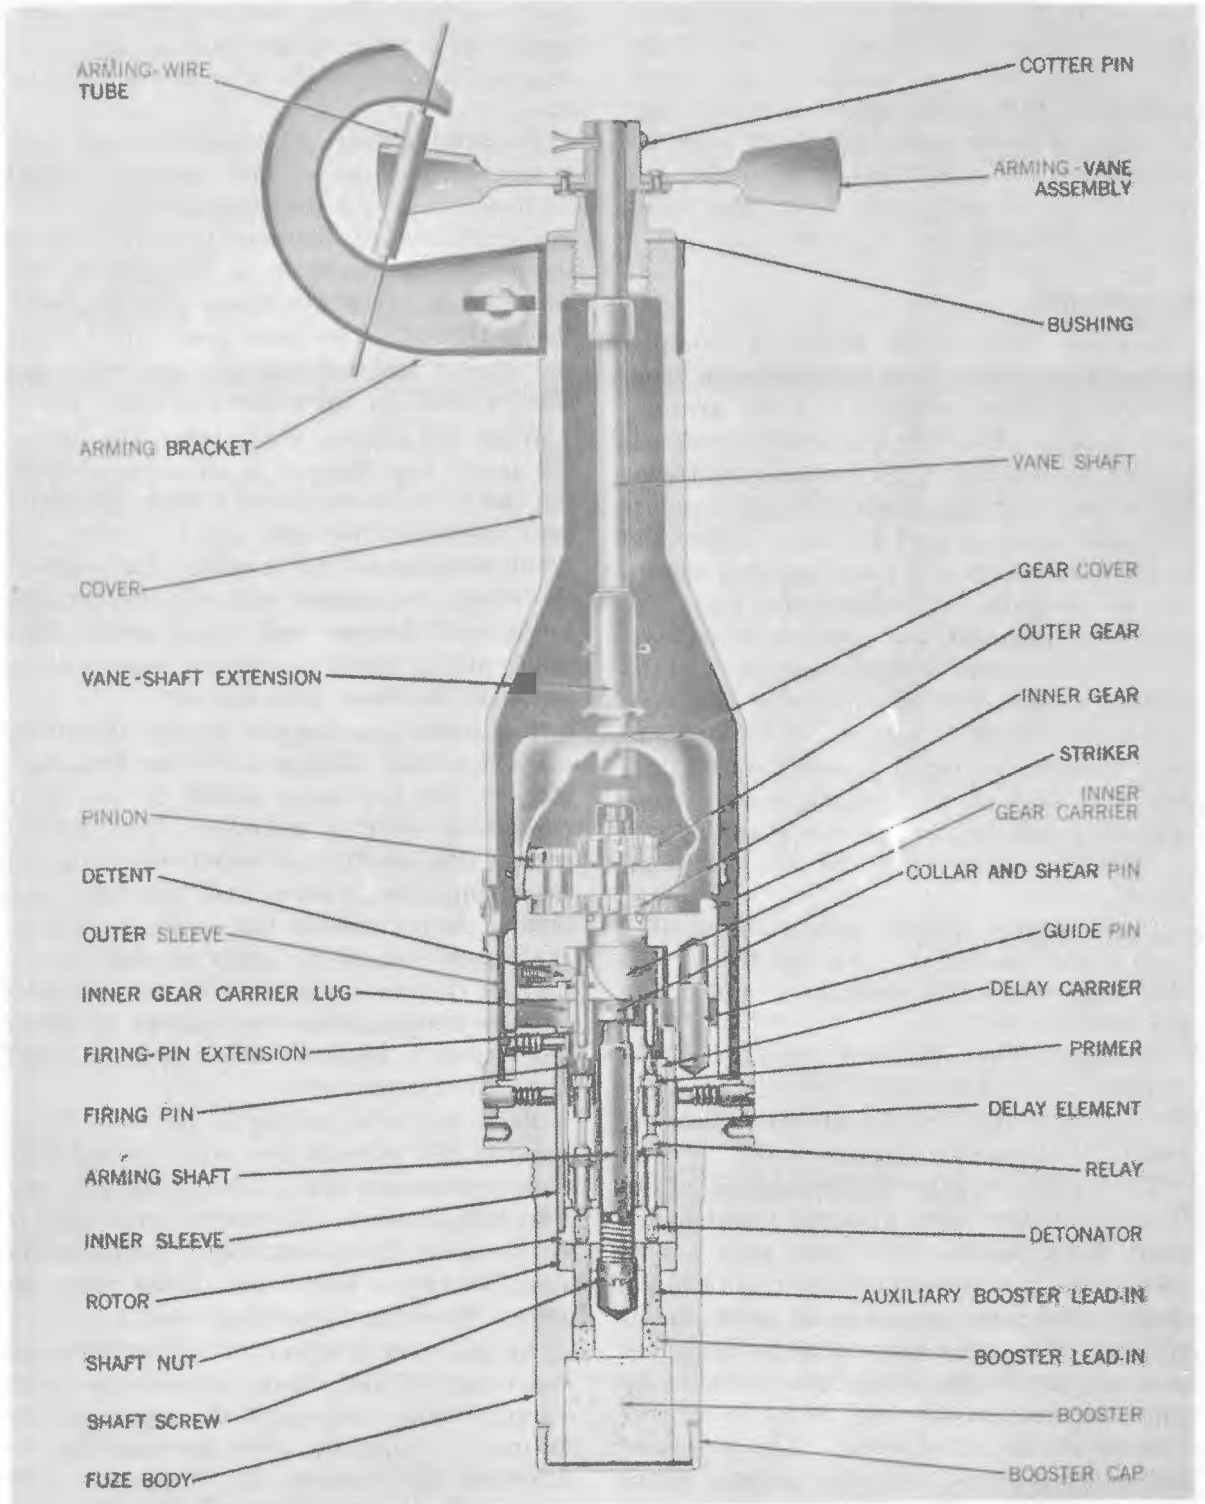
Impact Tail Fuze AN-Mk 228, Cross Section.
